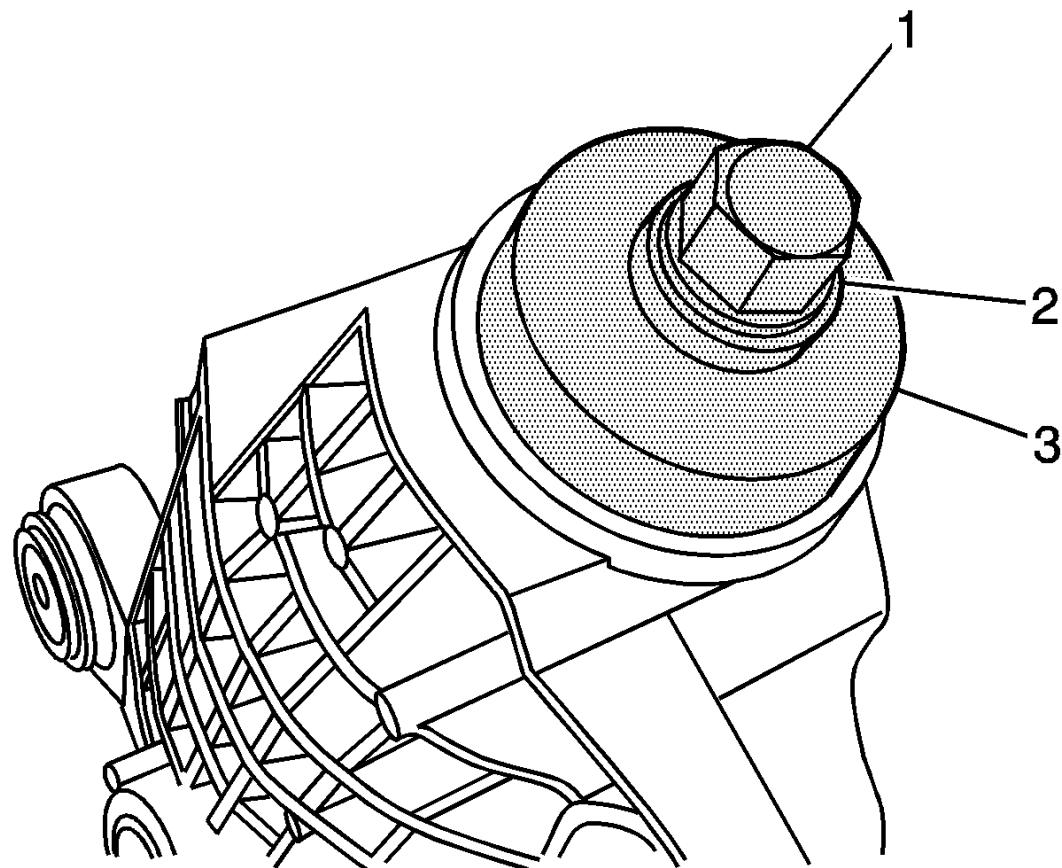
Thrust Bearing, Washer & Forcing Screw
